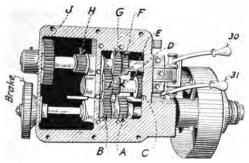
Speed box removed from shaper illustrated in Fig. 63.
